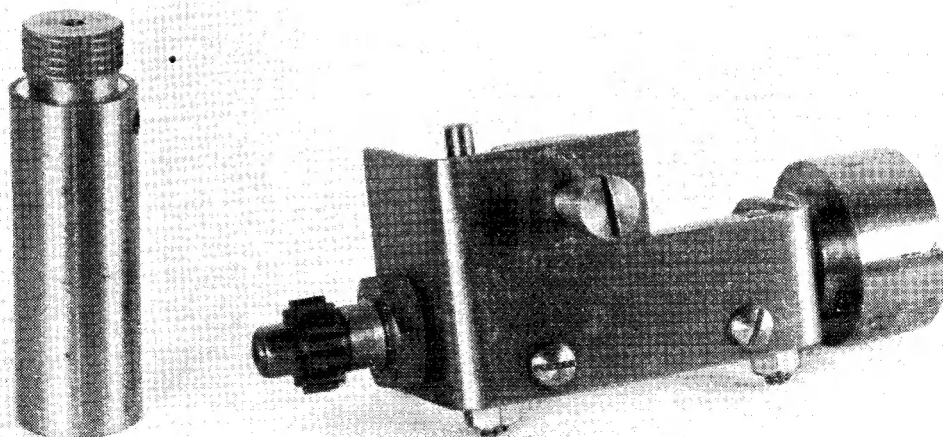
Left—a lighter wheel shaped in the lathe; Right—a bronze pinion with shaped teeth
